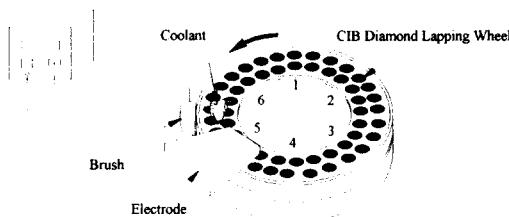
Schematic drawing of In-Process Dressing lapping experimental setup
